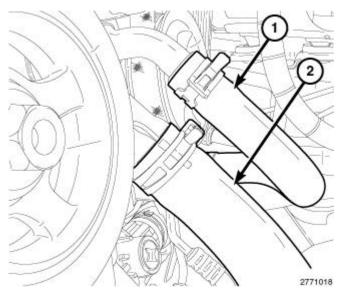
Radiator Hose & Heater Hose Courtesy of CHRYSLER GROUP, LLC
